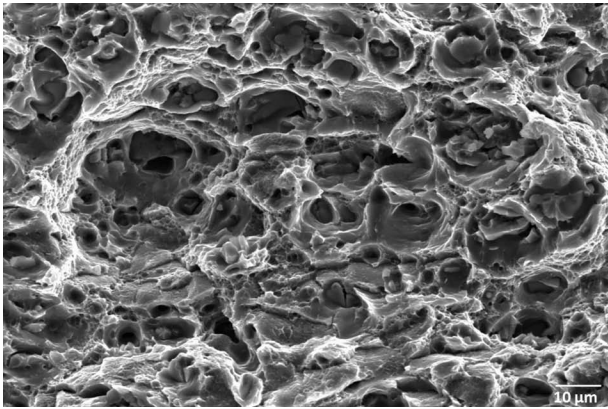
Higher magnified image of the fracture surface shown in Fig. 13
